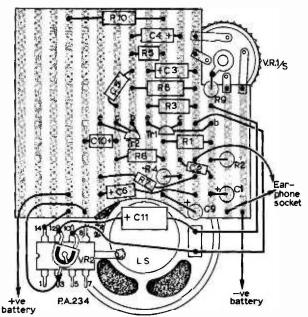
The component layout. The heat sink tab of the i.c. is soldered to the magnet of the loudspeaker.
